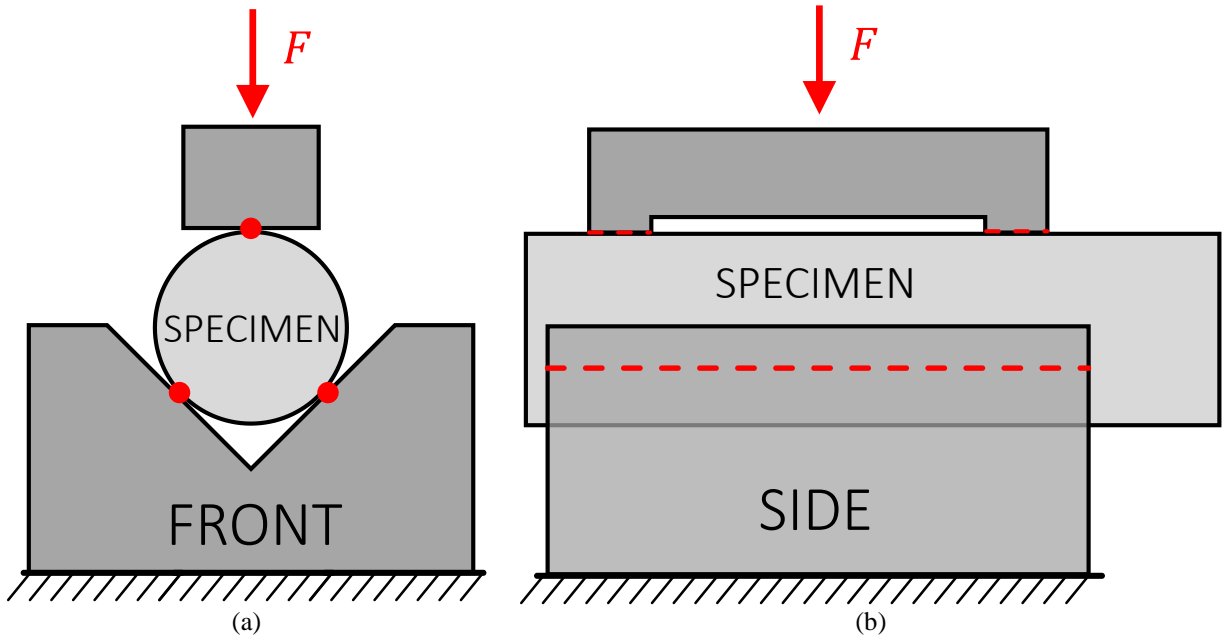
Schematic front and side views of workholding module with mounted specimen (a) Front view shows specimen nested in V-groove and three lines of contact (b) Side view, showing undercut on the top clamping pad. Clamping on the front and back of the specimen improves pitching resistance.
